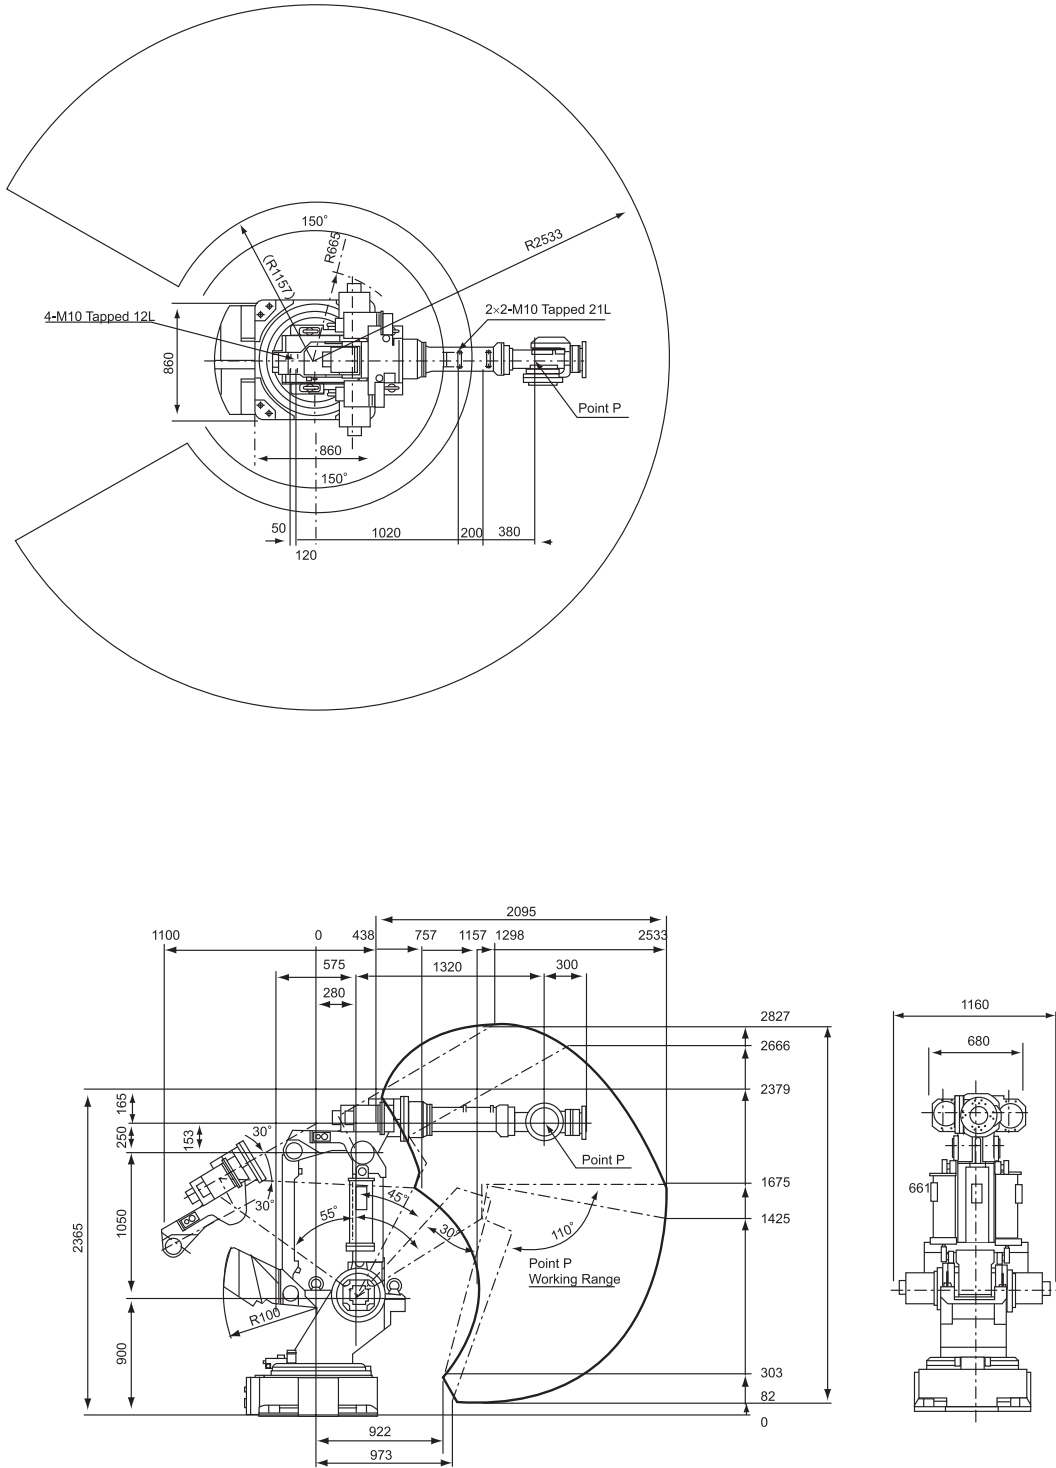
(a) Dimensions and Working Range (YR-SK300-J0)
